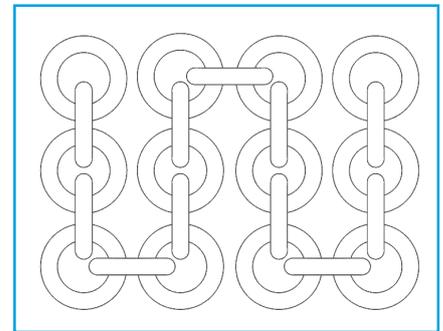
You can also design chains folded for compact packing and for printing parts that are longer than the print bed's dimensions.
